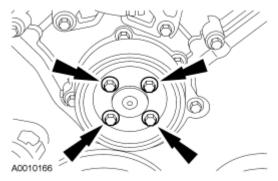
Belt Idler Pulley Bolt Courtesy of FORD MOTOR CO.
